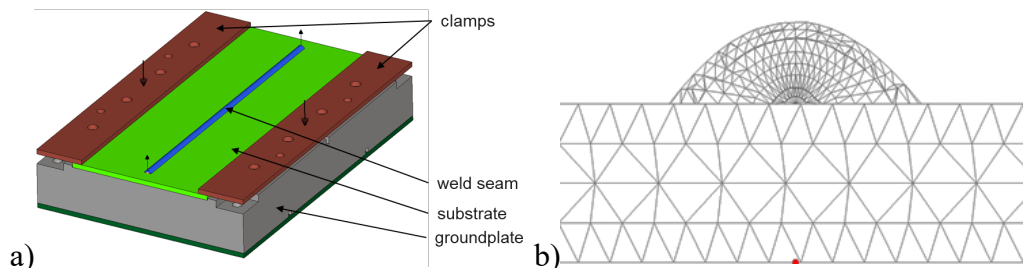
FE model developed in Simufact. Welding software: a) full setup, b) cross-section of the weld seam.
